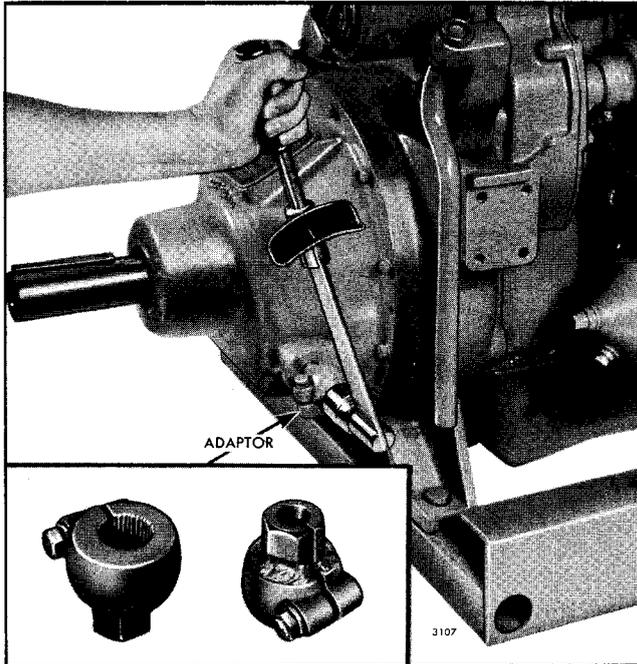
Checking Power Take-Off Clutch Adjustment with a Torque Wrench and an Adaptor
